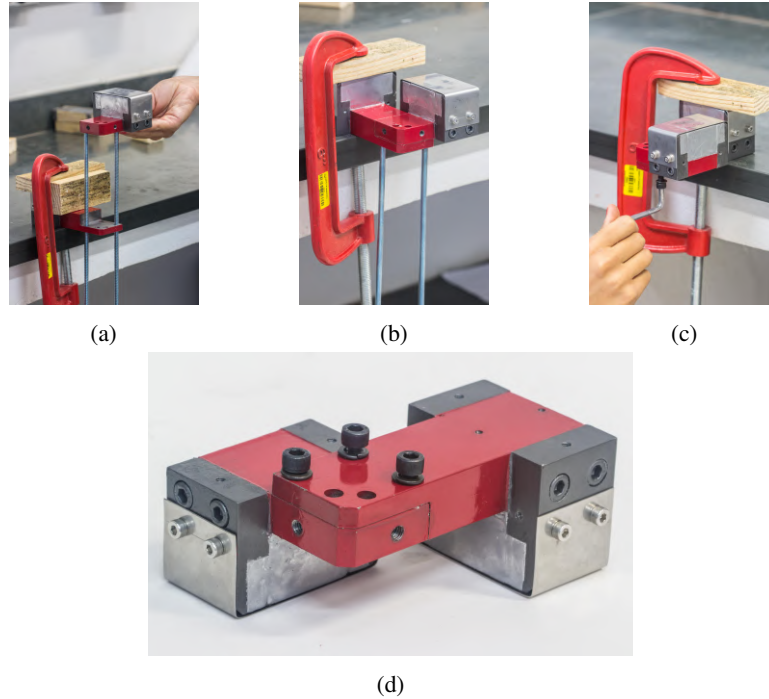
L-shape structure assembly: (a) bonded structures positioning; (b) bonded structures approximation; (c) screw tightening; (d) finished part.
